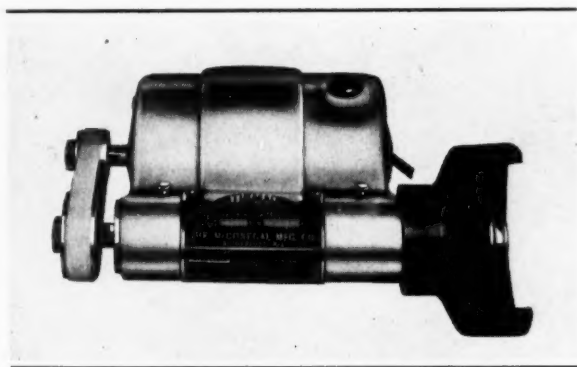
Themac Precision Grinder Designed for Use on Lathes
